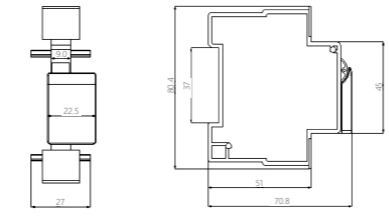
LMI-12 mechanical interlock appearance and installation dimension
